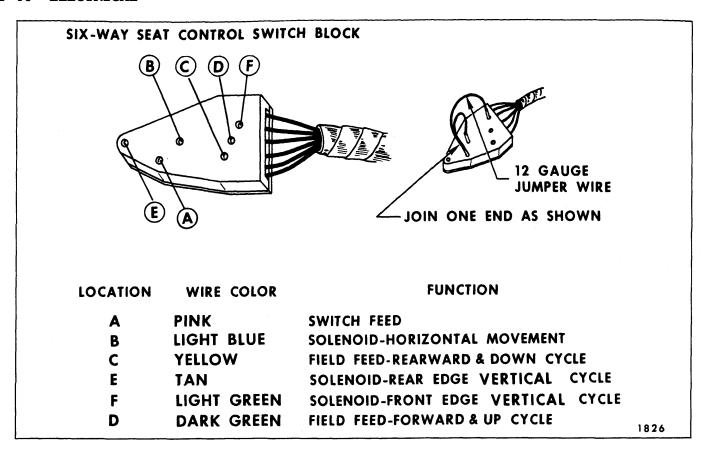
Six-Way Seat Switch Block - Switch in Seat Side Panel - Oldsmobile
